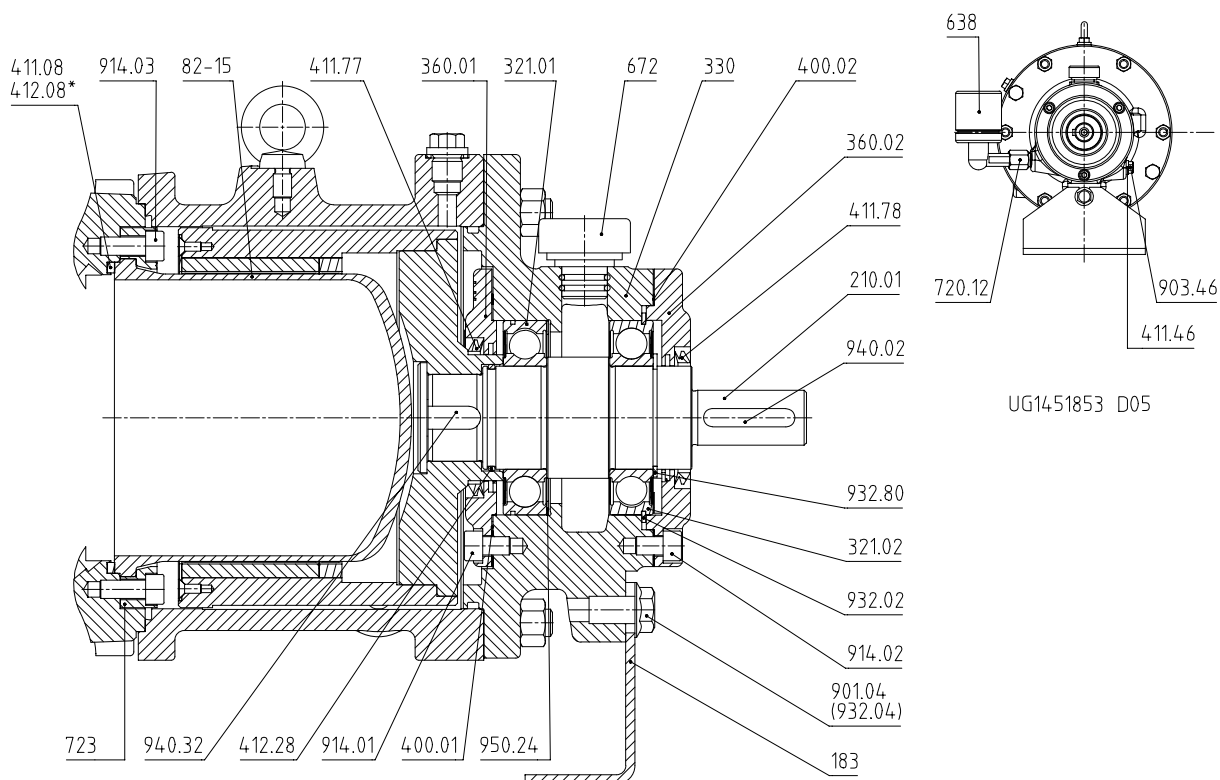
Model with bearing bracket with oil lubrication without shaft seal ring as leakage barrier
